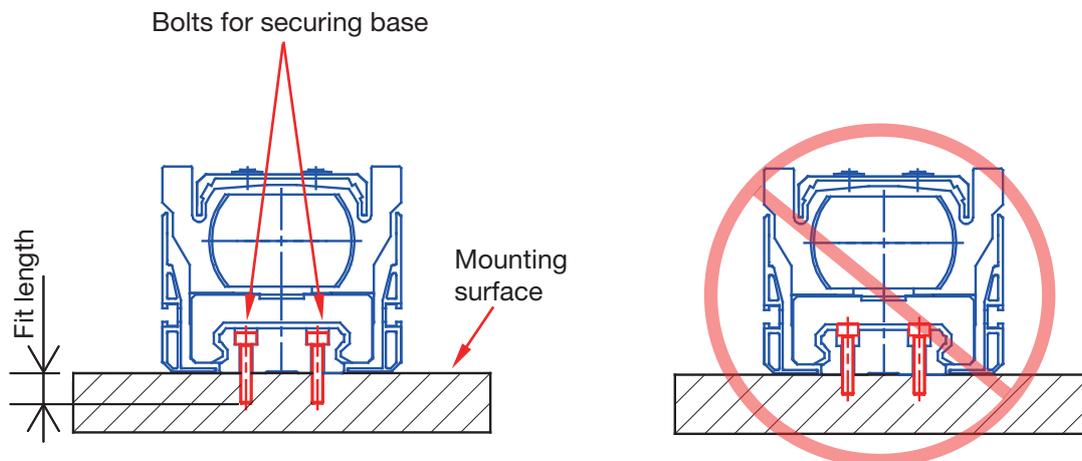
Drawing for mounting US6T/6RT/8T/8RT
